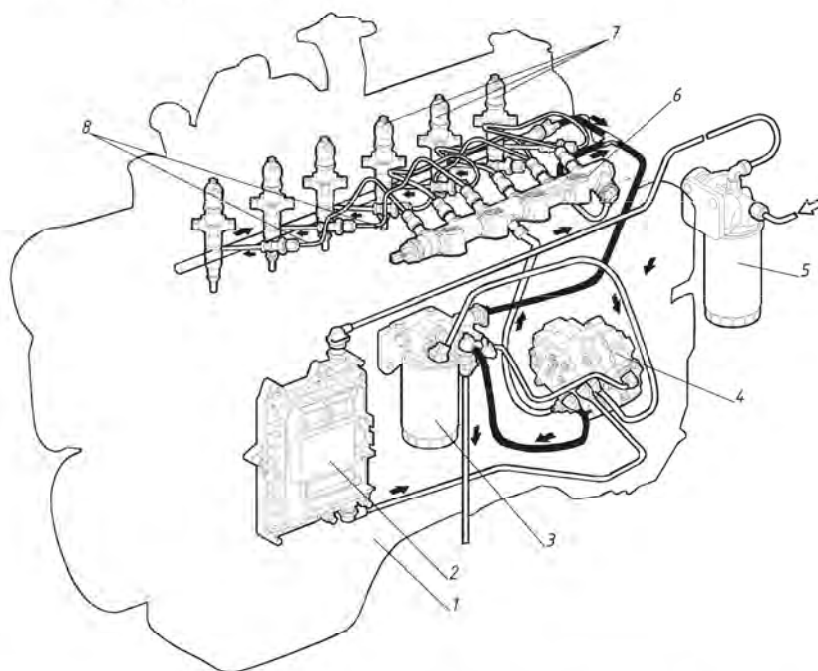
General arrangement of elements of the accumulator fuel injection system of a high-speed diesel engine: 1 – engine; 2 – electronic engine control unit; 3 – fine fuel filter; 4 – pump module; 5 – fuel coarse filter; 6 – accumulator; 7 – injectors with electromagnetic control; 8 – high pressure pipelines (adapted from [72])
